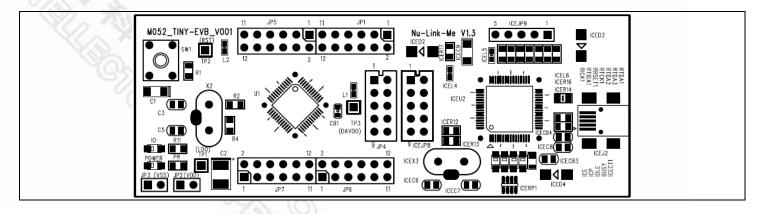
NuTiny-SDK-M051 PCB Placement
